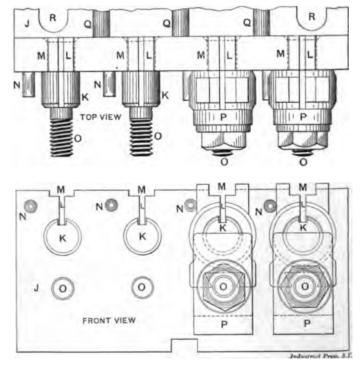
Fixture Used in Slotting Piece shown in Fig. 11.
